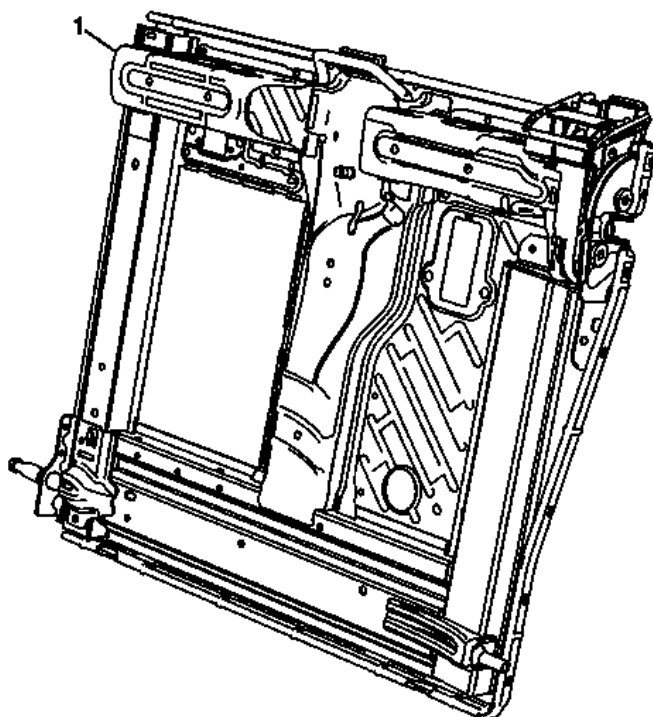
Rear Seat Back Cushion Panel (60% Side)
